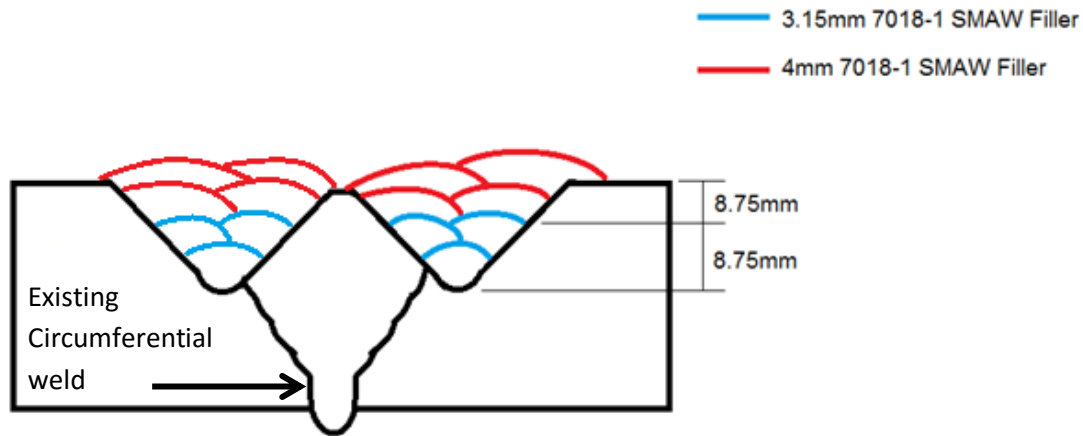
Schematic illustration of a half thickness welding sequence based on WPS 1-1-D-21-1 Rev 2a
